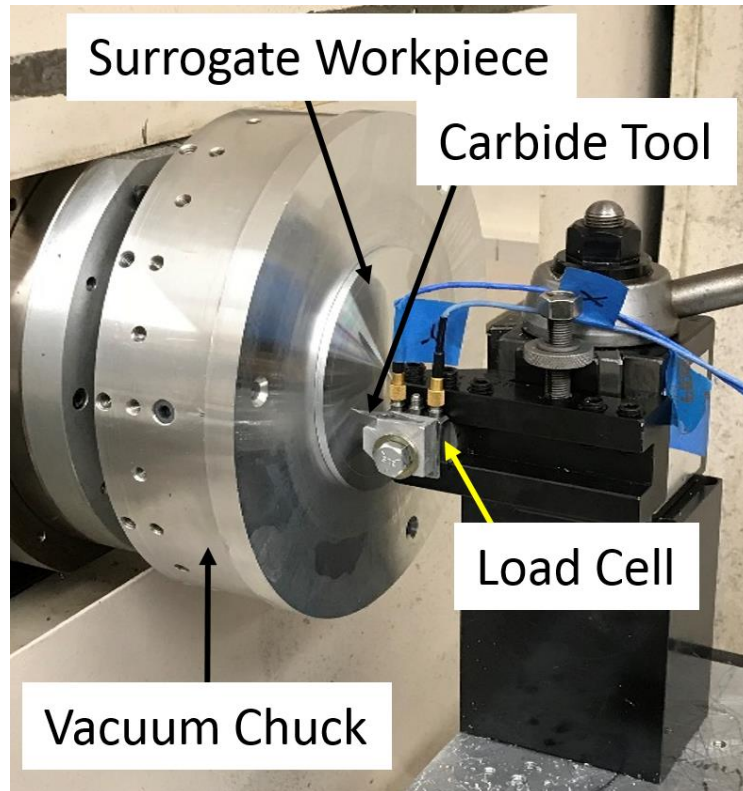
Nanoform 600 Diamond Turning Machine Equipped with an 1199 Aluminum Workpiece, a Kennametal Carbide Turning Insert, and a Kistler Piezoelectric Load Cell
